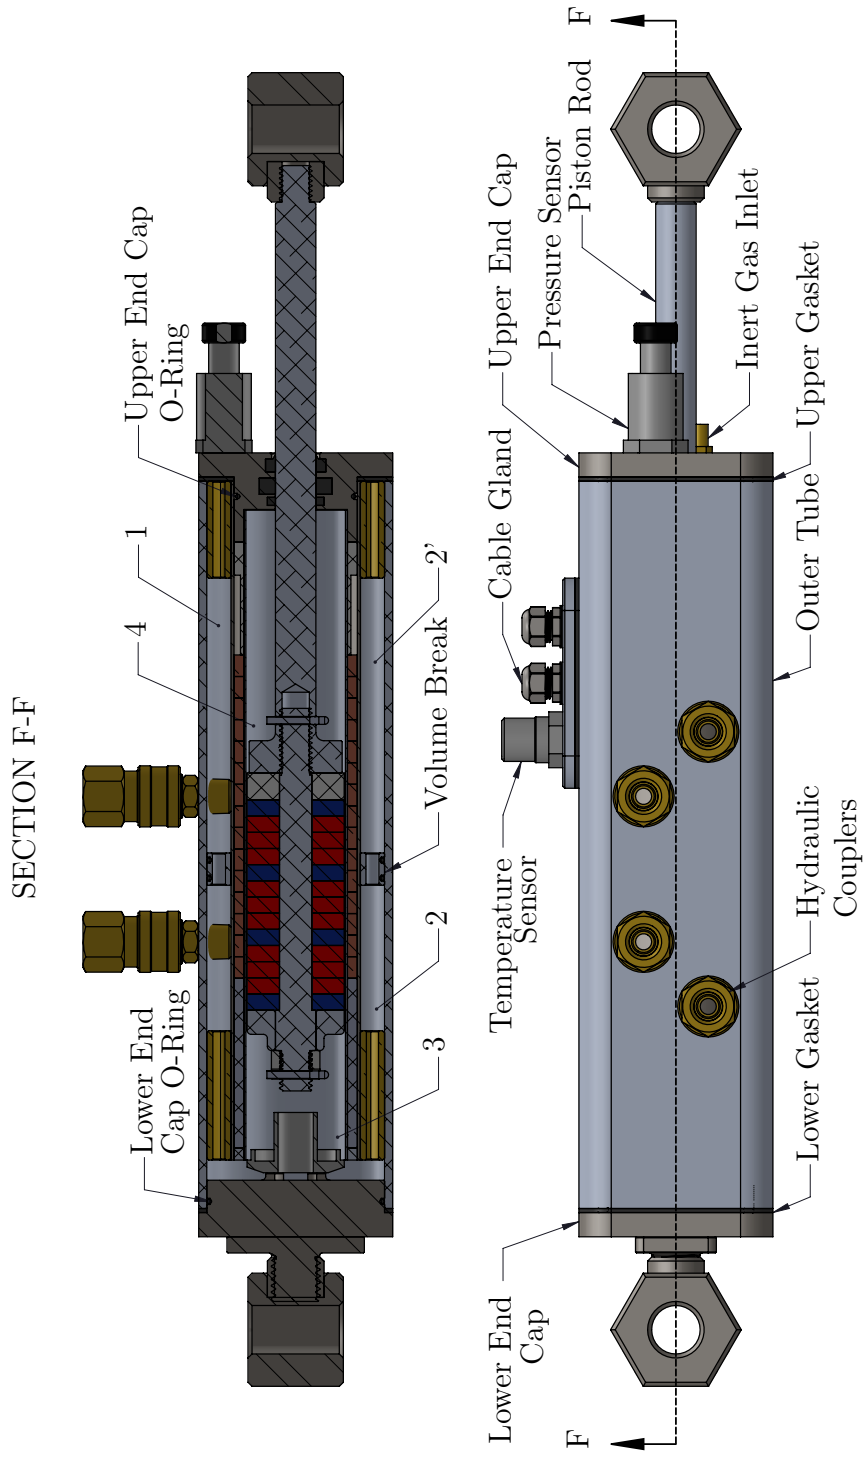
Hybrid Damper Twin Tube Prototype Design.
